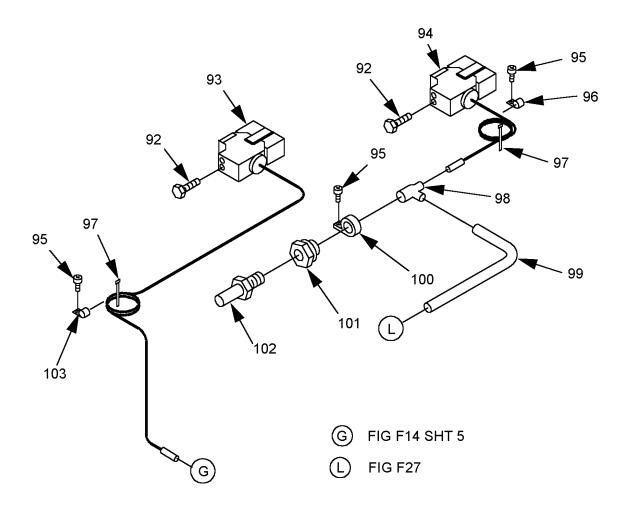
Condenser Assembly (Sheet 6 of 6)
